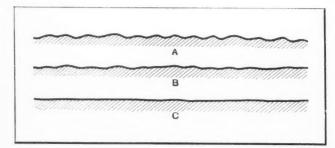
Magnified Cutting Edges of Ground, Honed, and Lapped Carboloy Tools
